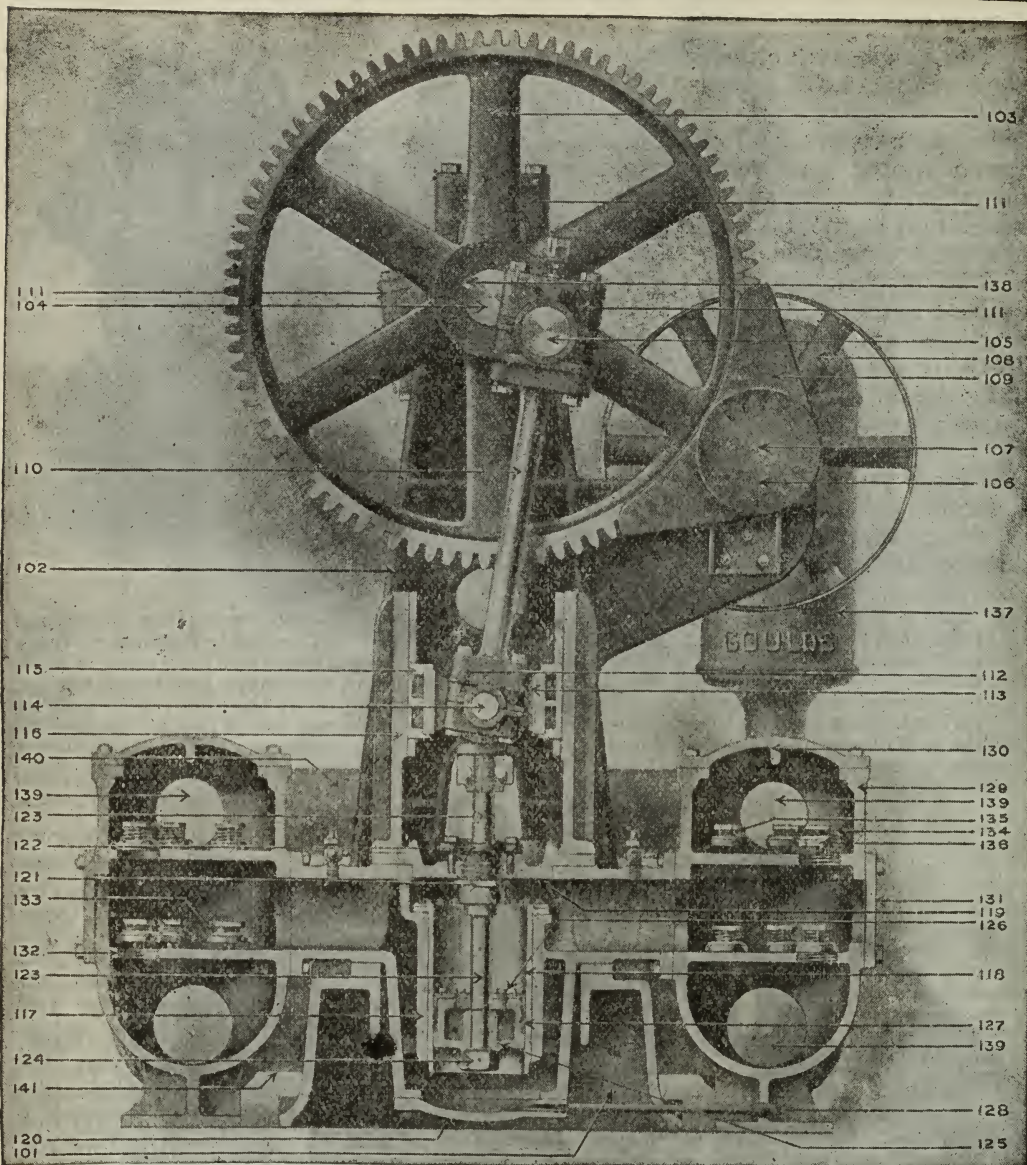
,323.—Sectional view of Goulds double acting piston triplex pump with *double reduction combination long belt and spur gear drive*, showing construction. *The parts are:* 101, base; 102, standard; 103, main gear; 104, crank shaft; 105, crank pin 106, main pinion; 107, pinion shaft; 108, pulley; 109, gear guard; 110, connecting rod; 111, upper connecting rod box; 112, lower connecting rod box; 113, cross head; 114, cross head pin; 115, cross head shoe; 116, cross head guide; 117, cylinder; 118, cylinder lining; 119, cylinder head; 120, cylinder bottom flange; 121, stuffing box; 122, gland; 123, piston rod; 124, piston rod nut; 125, piston body; 126, piston follower; 127, piston packing; 128, drain pipe and plug; 129, valve box; 130, valve box cover; 131, hand hole cover; 132, valve seat; 133, valve plate; 134, valve stem; 135, valve spring; 136, rubber valve disc; 137, air chamber; 138, gear key; 139, water passages; 140, discharge pipe; 141, suction pipe.
